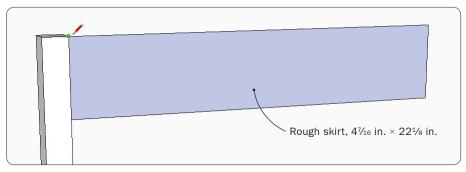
Use the Line Tool to draw a face that you will then make a component.
